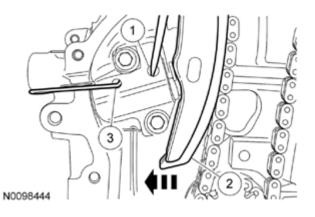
Compressing Timing Chain Tensioner Courtesy of FORD MOTOR CO.
